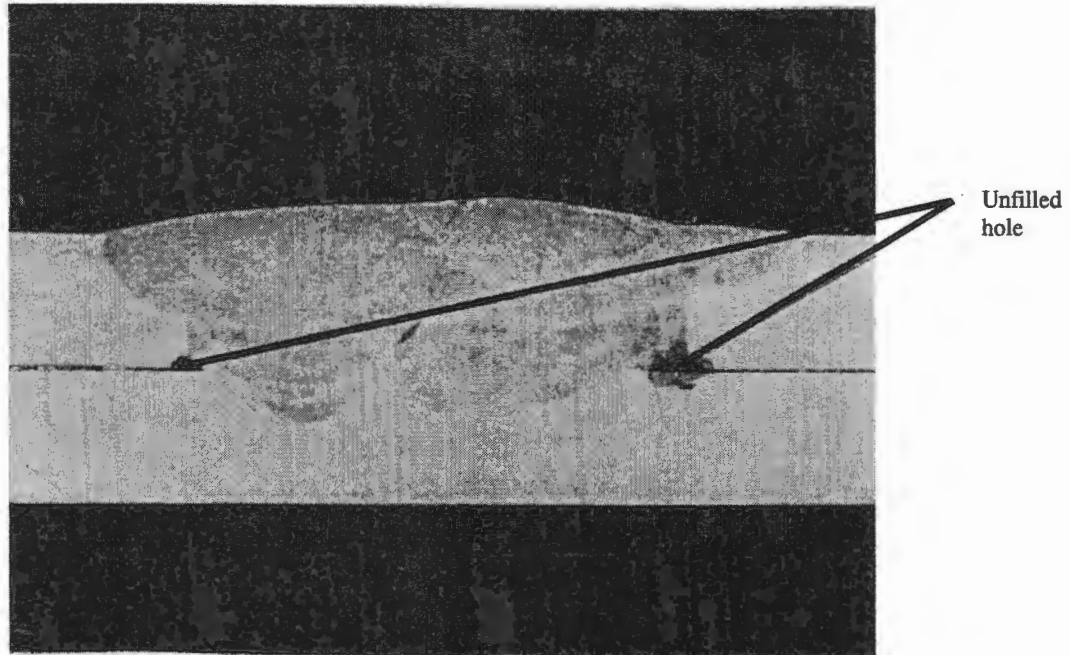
Cross section of a plug weld specimen etched with 1% nital etchant (note the unfilled hole); magnified 10 $\times$ .
